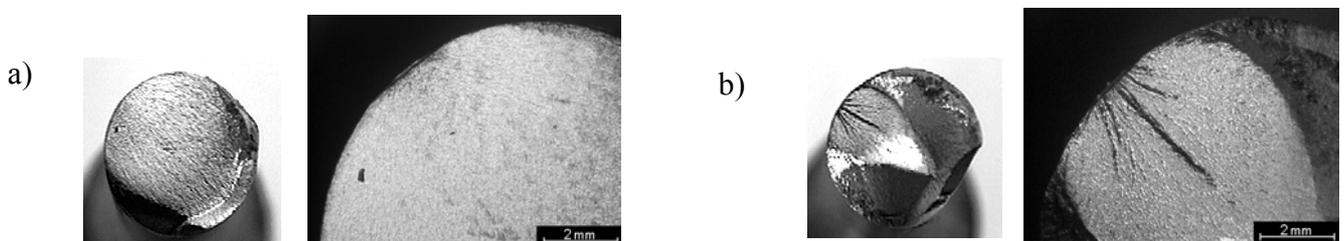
Macroscopic appearance of fracture surfaces. $\Delta\sigma = 1060$ MPa. a) without torsion; b) with torsion.
